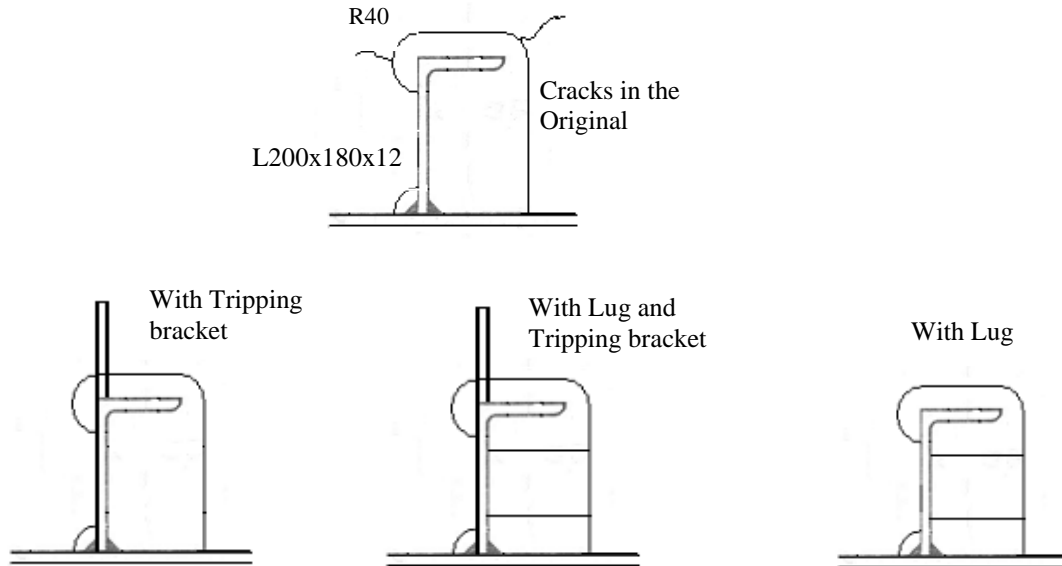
Crack in original structural connection and different repair alternatives [1].
